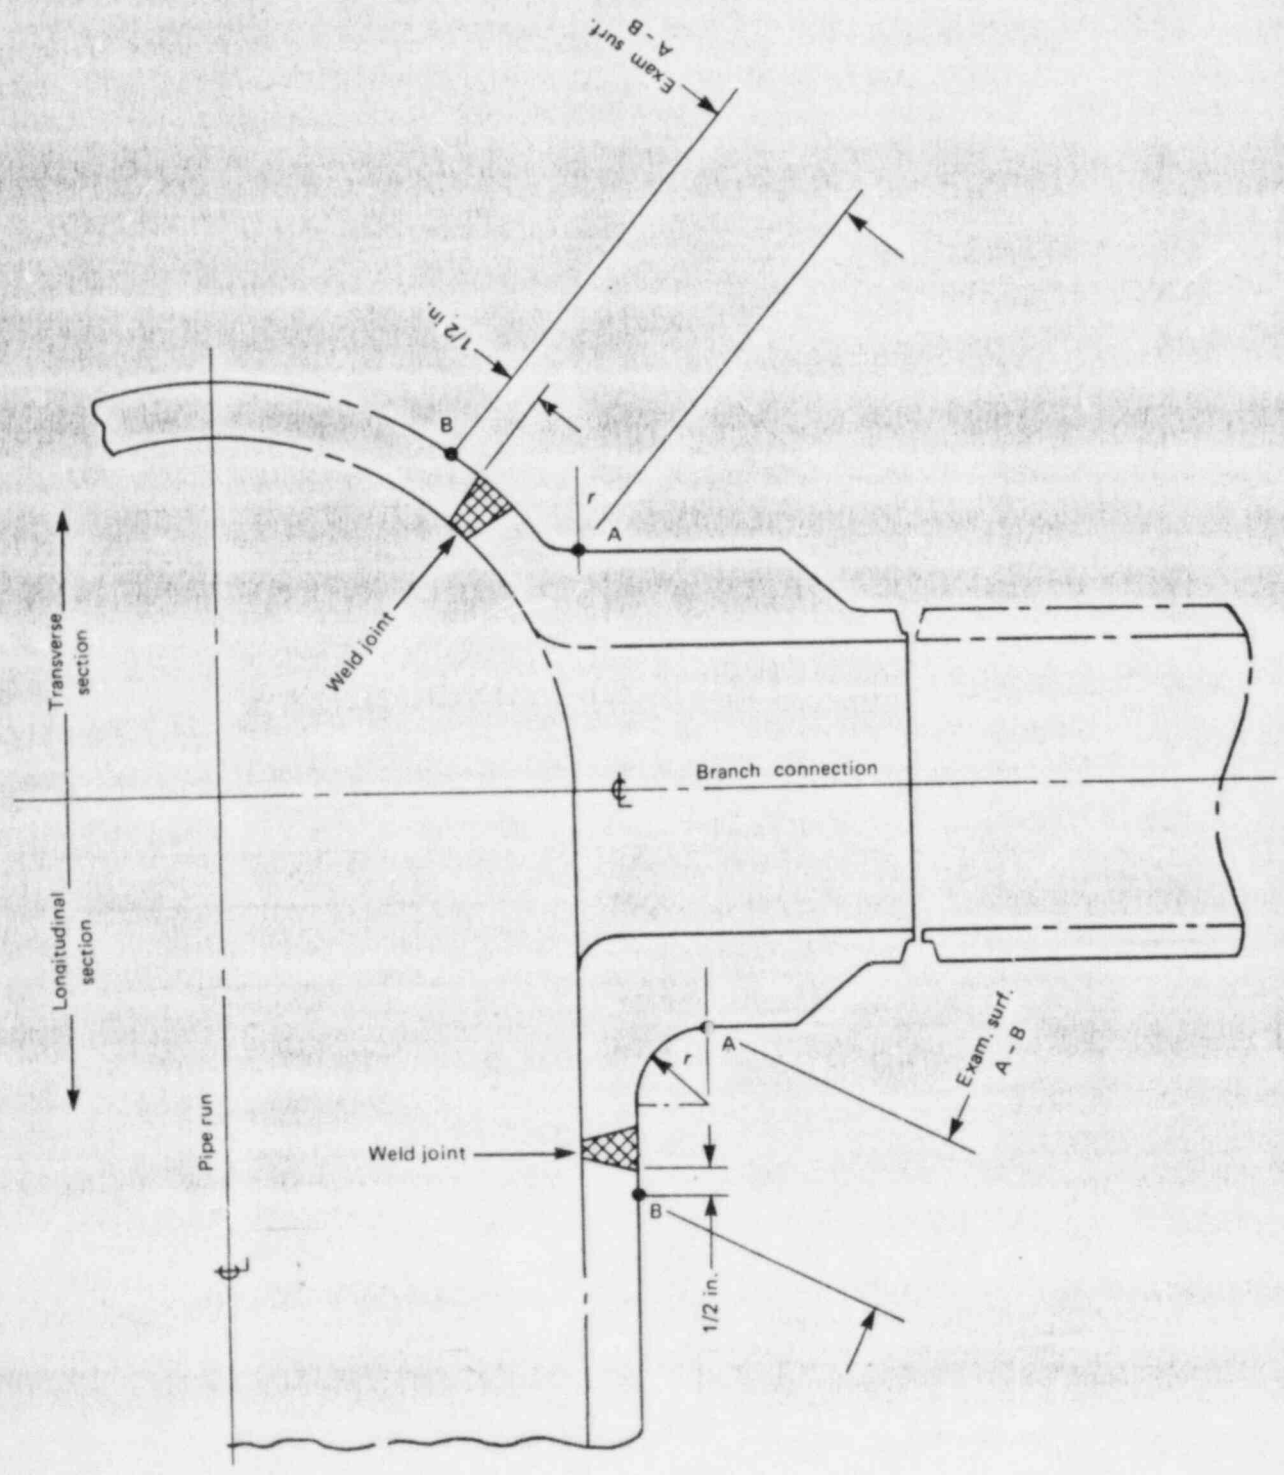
BRANCH CONNECTION WELDS
